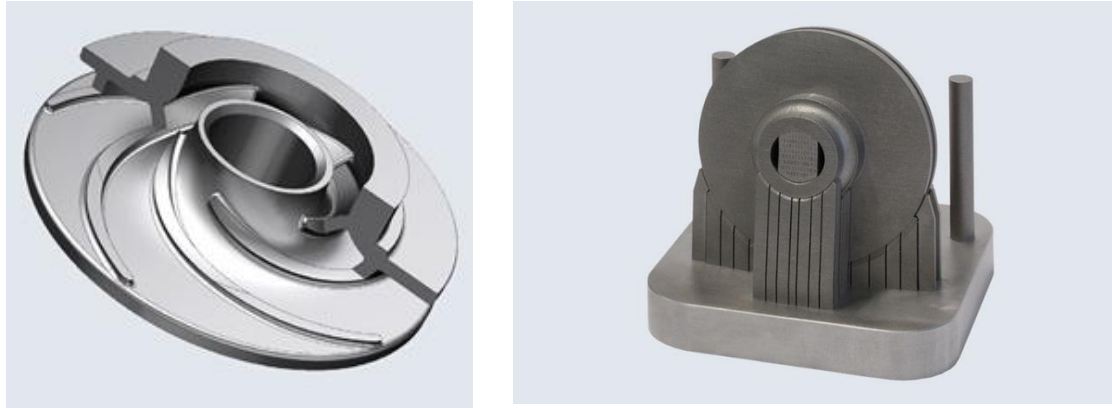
Pump impeller (a) design and (b) prototype made by selective laser melting. The material in picture is IN625 but the target material is stainless steel, and diameter is 92.4 mm [9]
